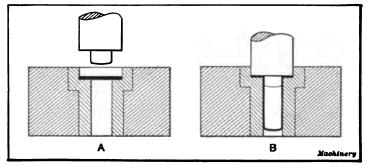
Lee's Method of Making Tubular Articles, Patented in 1906, A, the Die with Blank in Position; B, the Extruded Shell
